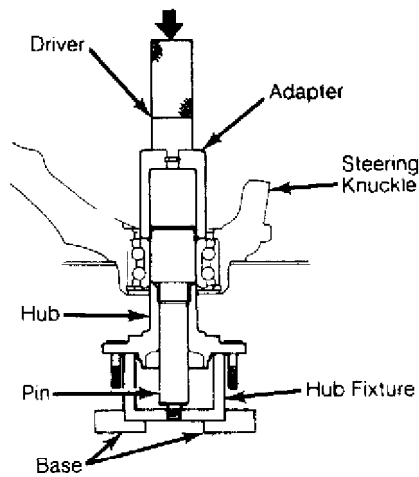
Pressing Knuckle/Bearing Assembly Onto Hub
